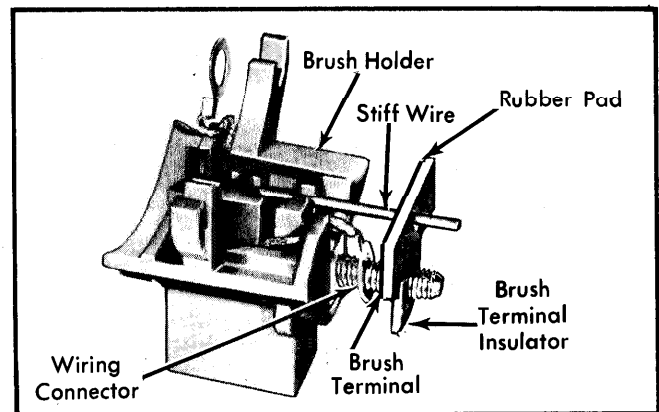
Brush Holder Assembly with Wire for Retaining Brushes in Place Inserted Through Holes
